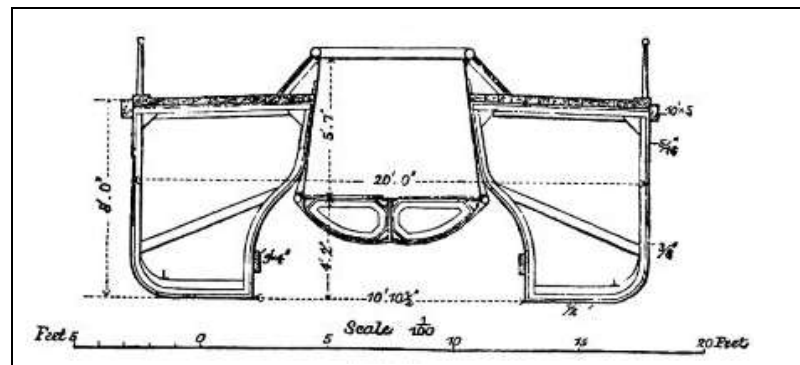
WD Cay's hopper barge to lay concrete bags
